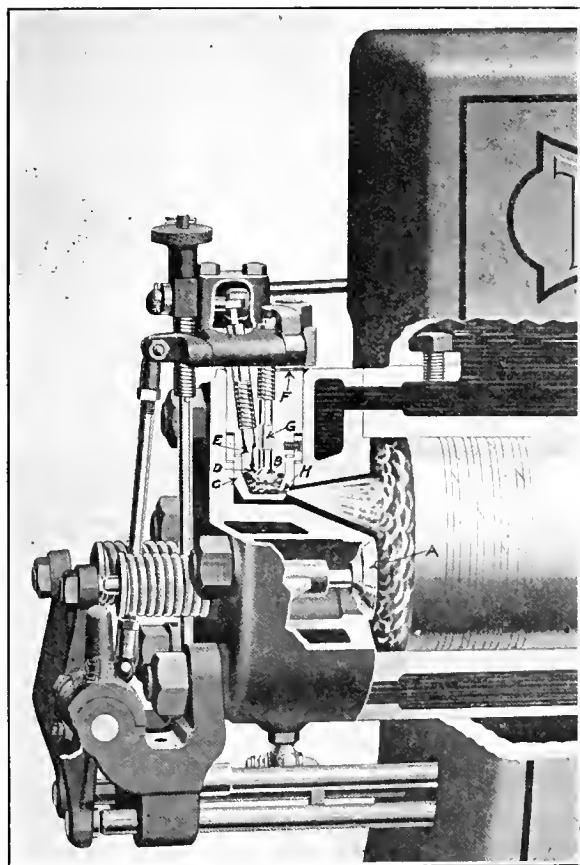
CUTAWAY SECTION OF 8-HP. HVID-TYPE FARM ENGINE
